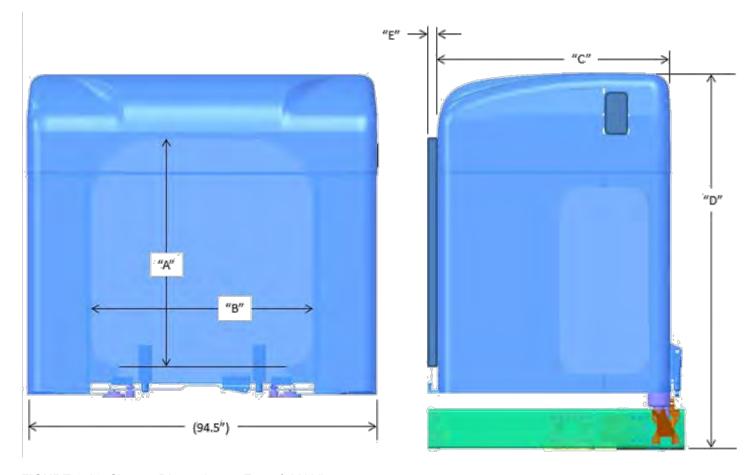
Sleeper Dimensions – Front & LH View
